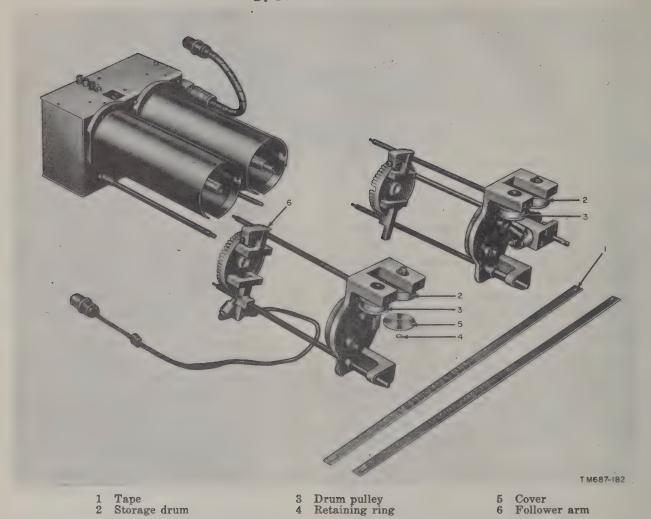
Transmitter B-band rf tuner, partially exploded view.
